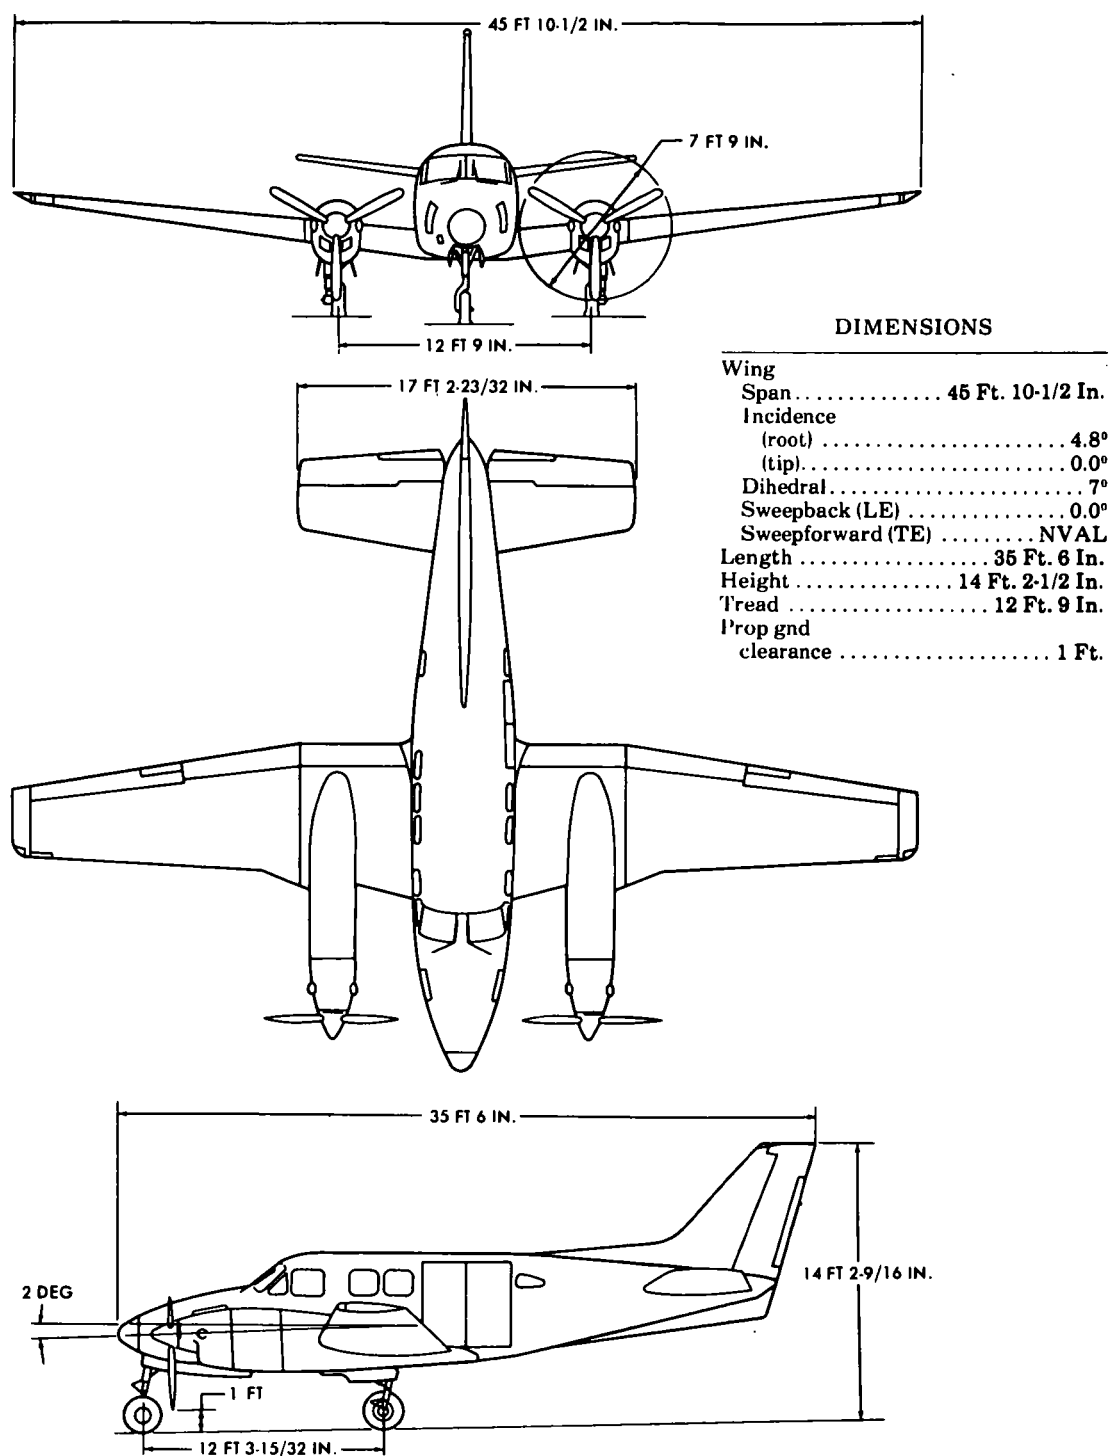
Principal Dimensions, U-21A, U-21G (UTE)
